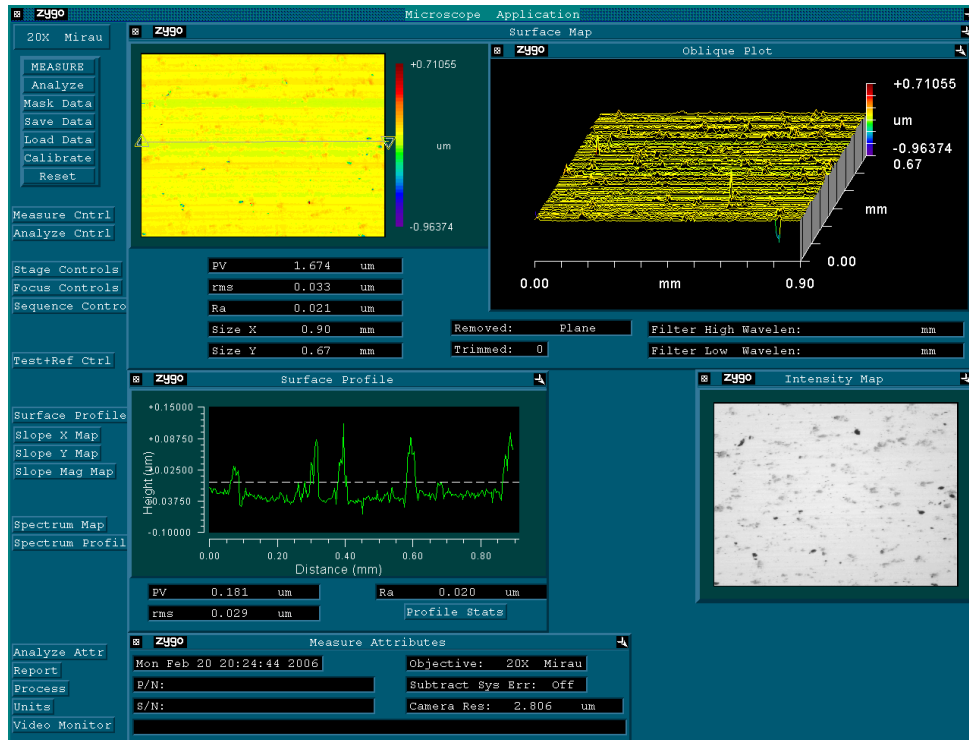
Surface roughness of the mirror surface machined on Machine A
